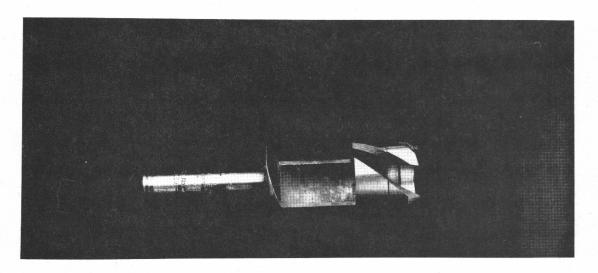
Cutter for making 1-inch cylindrical plugs about 2 inches long.
